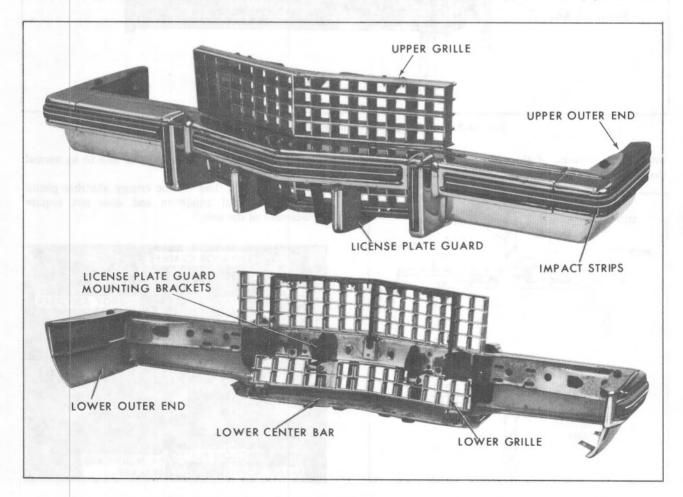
Front Bumper Assembly—Except Eldorado
